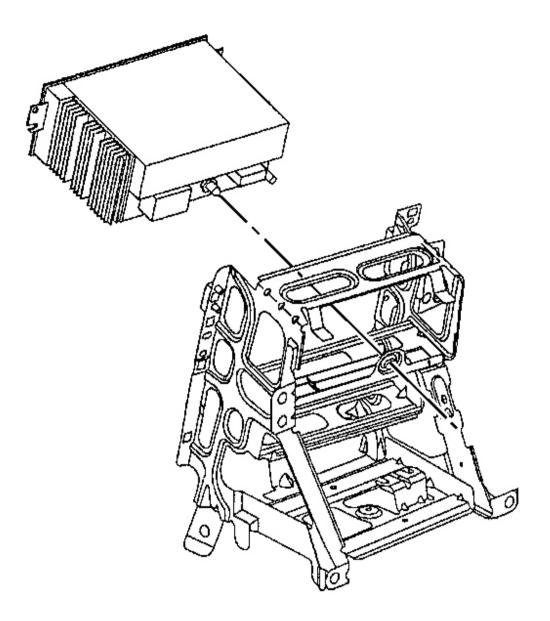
Radio Control To Bracket Alignment Courtesy of GENERAL MOTORS CORP.
